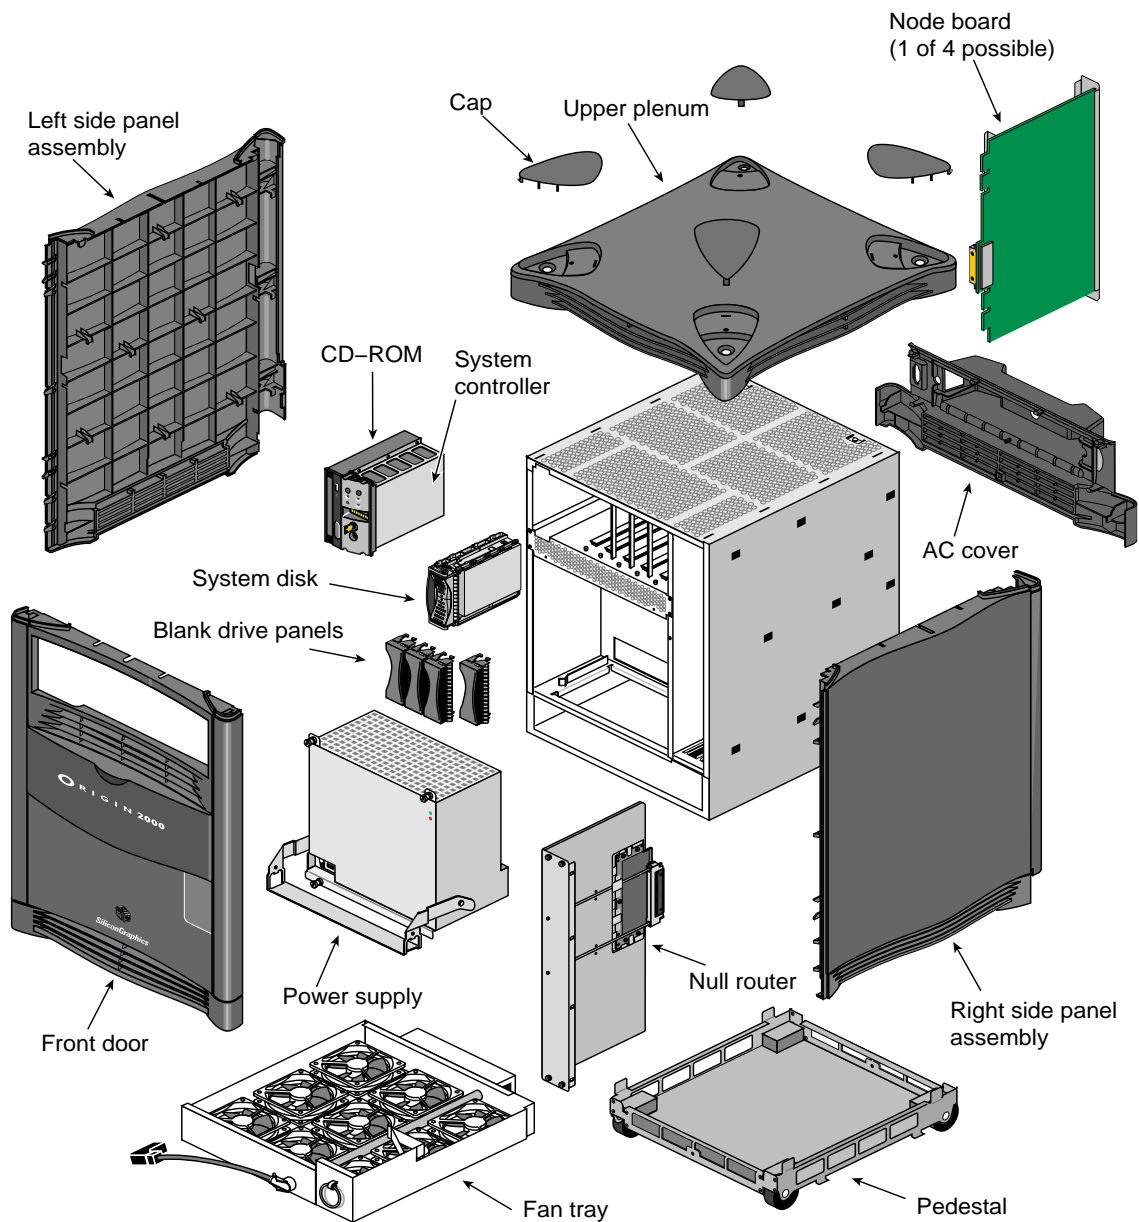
Origin2000 Deskside System Components (Exploded View)
